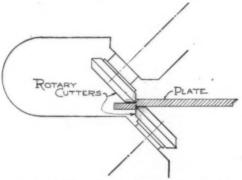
PRINCIPLE OF ROTARY SHEAR
